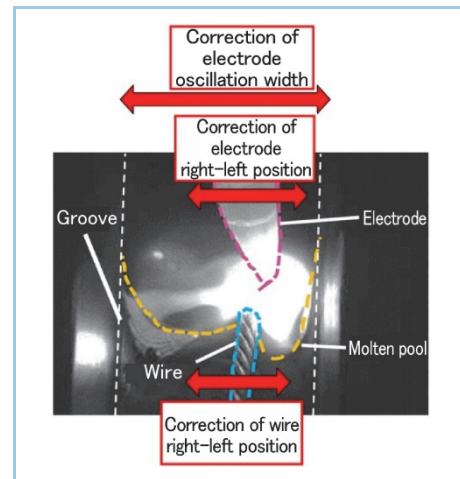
Welding area image and schematic diagram of welding operator operations
